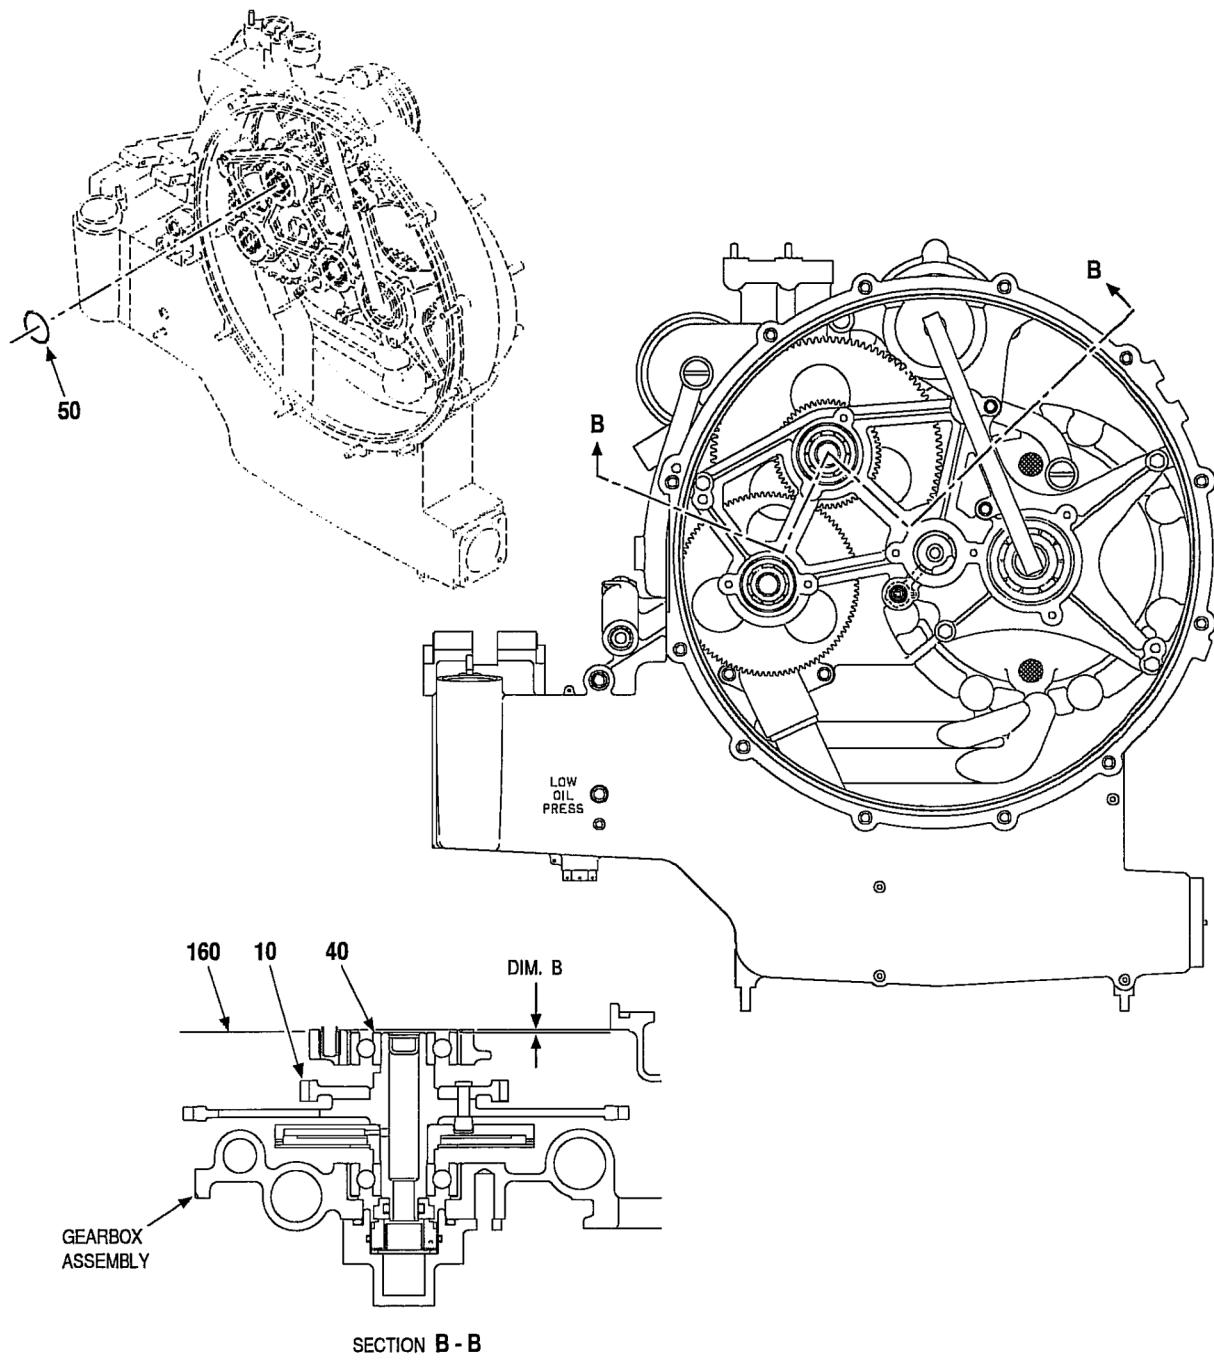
Calculate and Install Compound Idler Assembly Bearing Shims
